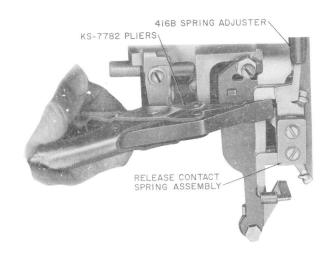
Method of Adjusting U-Shaped Springs on Release Contact Spring Assemblies
